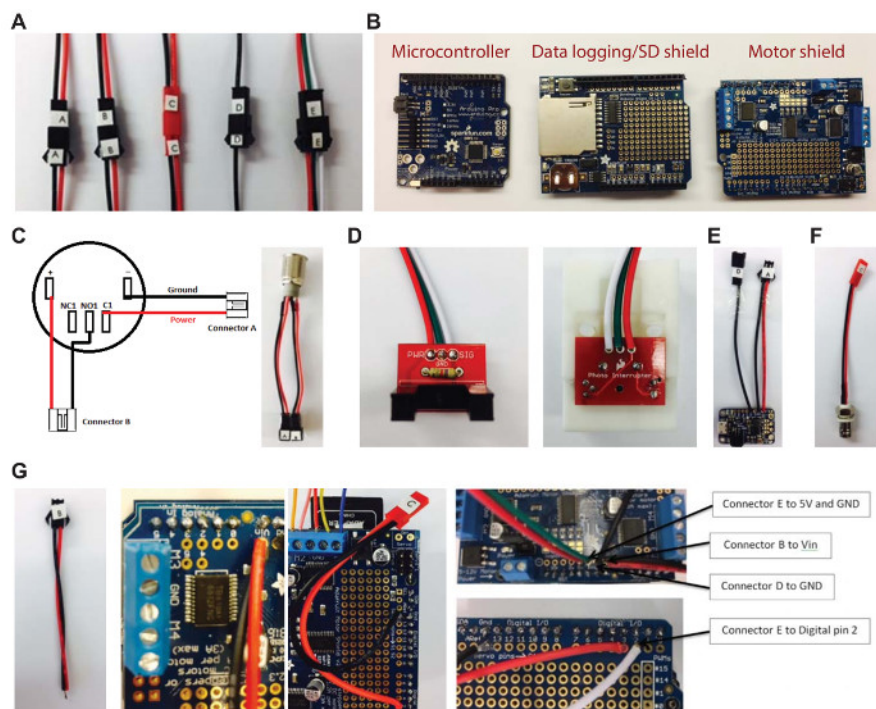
Wiring of FED Electrical Components. Wiring and assembly of (A) Connectors (B) Microcontroller, Data logging/SD shield, Motor shield, (C) Power button, (D) Photointerrupter, (E) Boost board, (F) BNC output cable, (G) Wiring of motor shield. [Please click here to view a larger version of this figure.](#)
